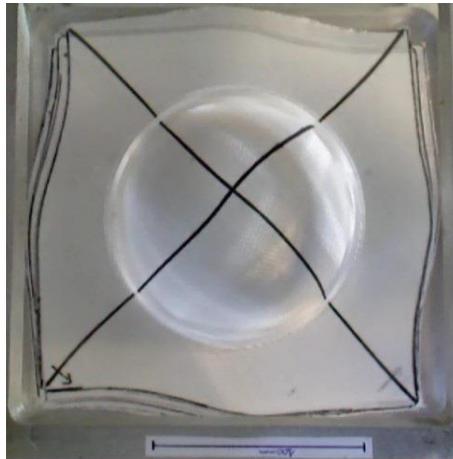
Deformed preform:  $[-45^\circ/+45^\circ]_4$  after hemispherical stamping.
